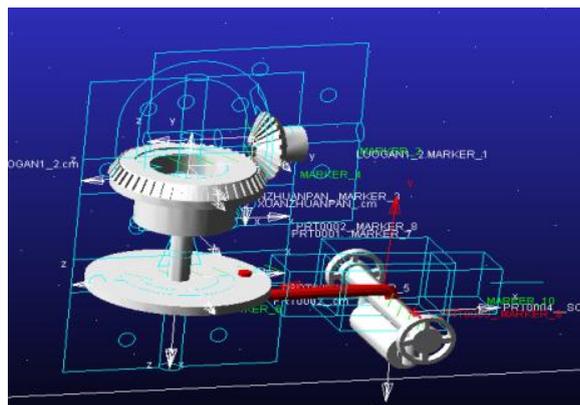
Adsorption mechanism (cleaning machine assembly)
